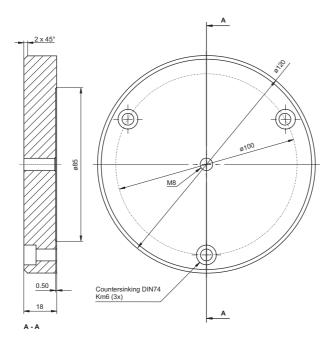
Base plate for the flexible arm OFV-039 (dimensions not specified are given in mm)
